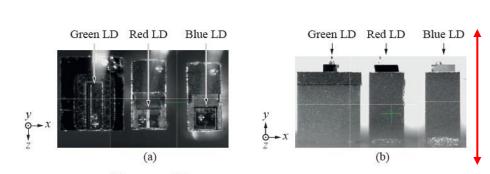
(a) Top and (b) front view of the laser diode subassemblies.
